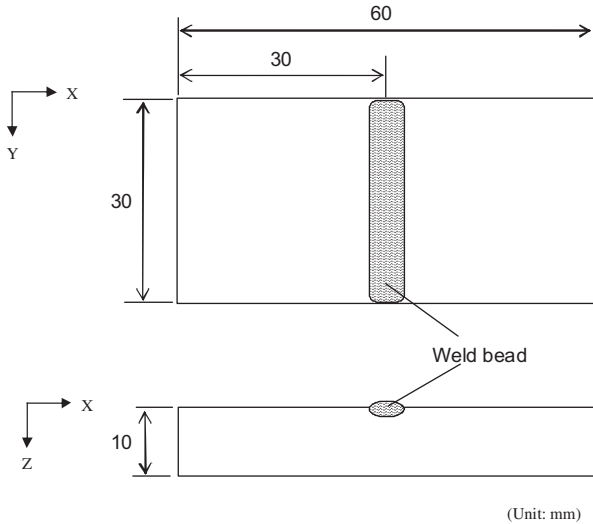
Schematic illustration of welded type 316L specimen.
